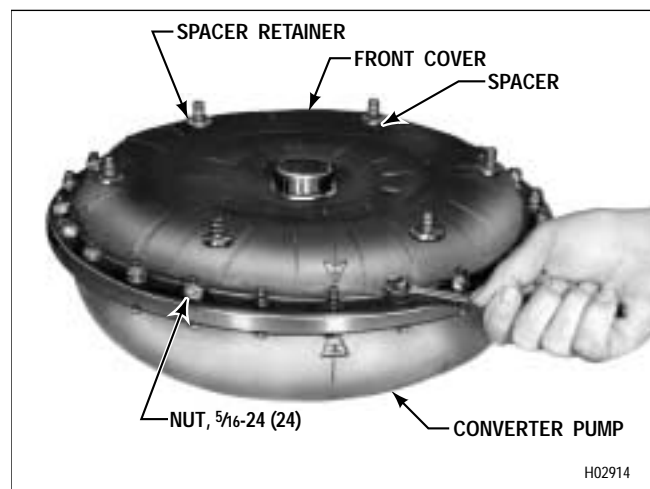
Removing (or Installing) Torque Converter Cover Nuts (AT 543)
